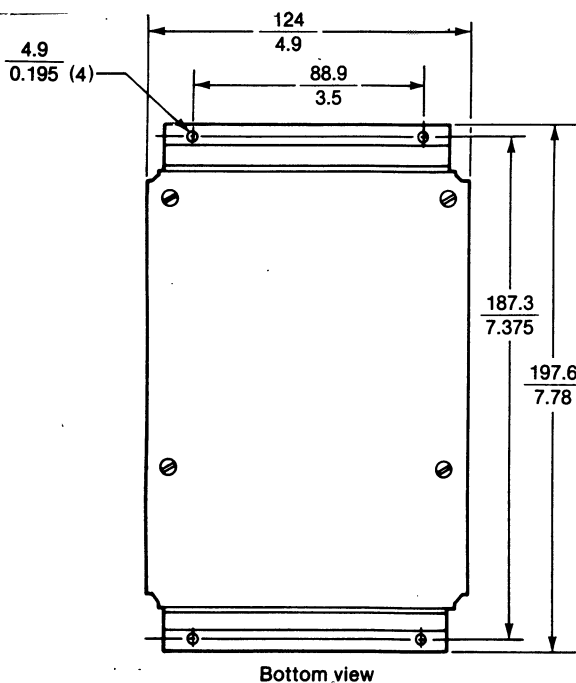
Dimensions drawings—Model R7195A, B motor positioners
